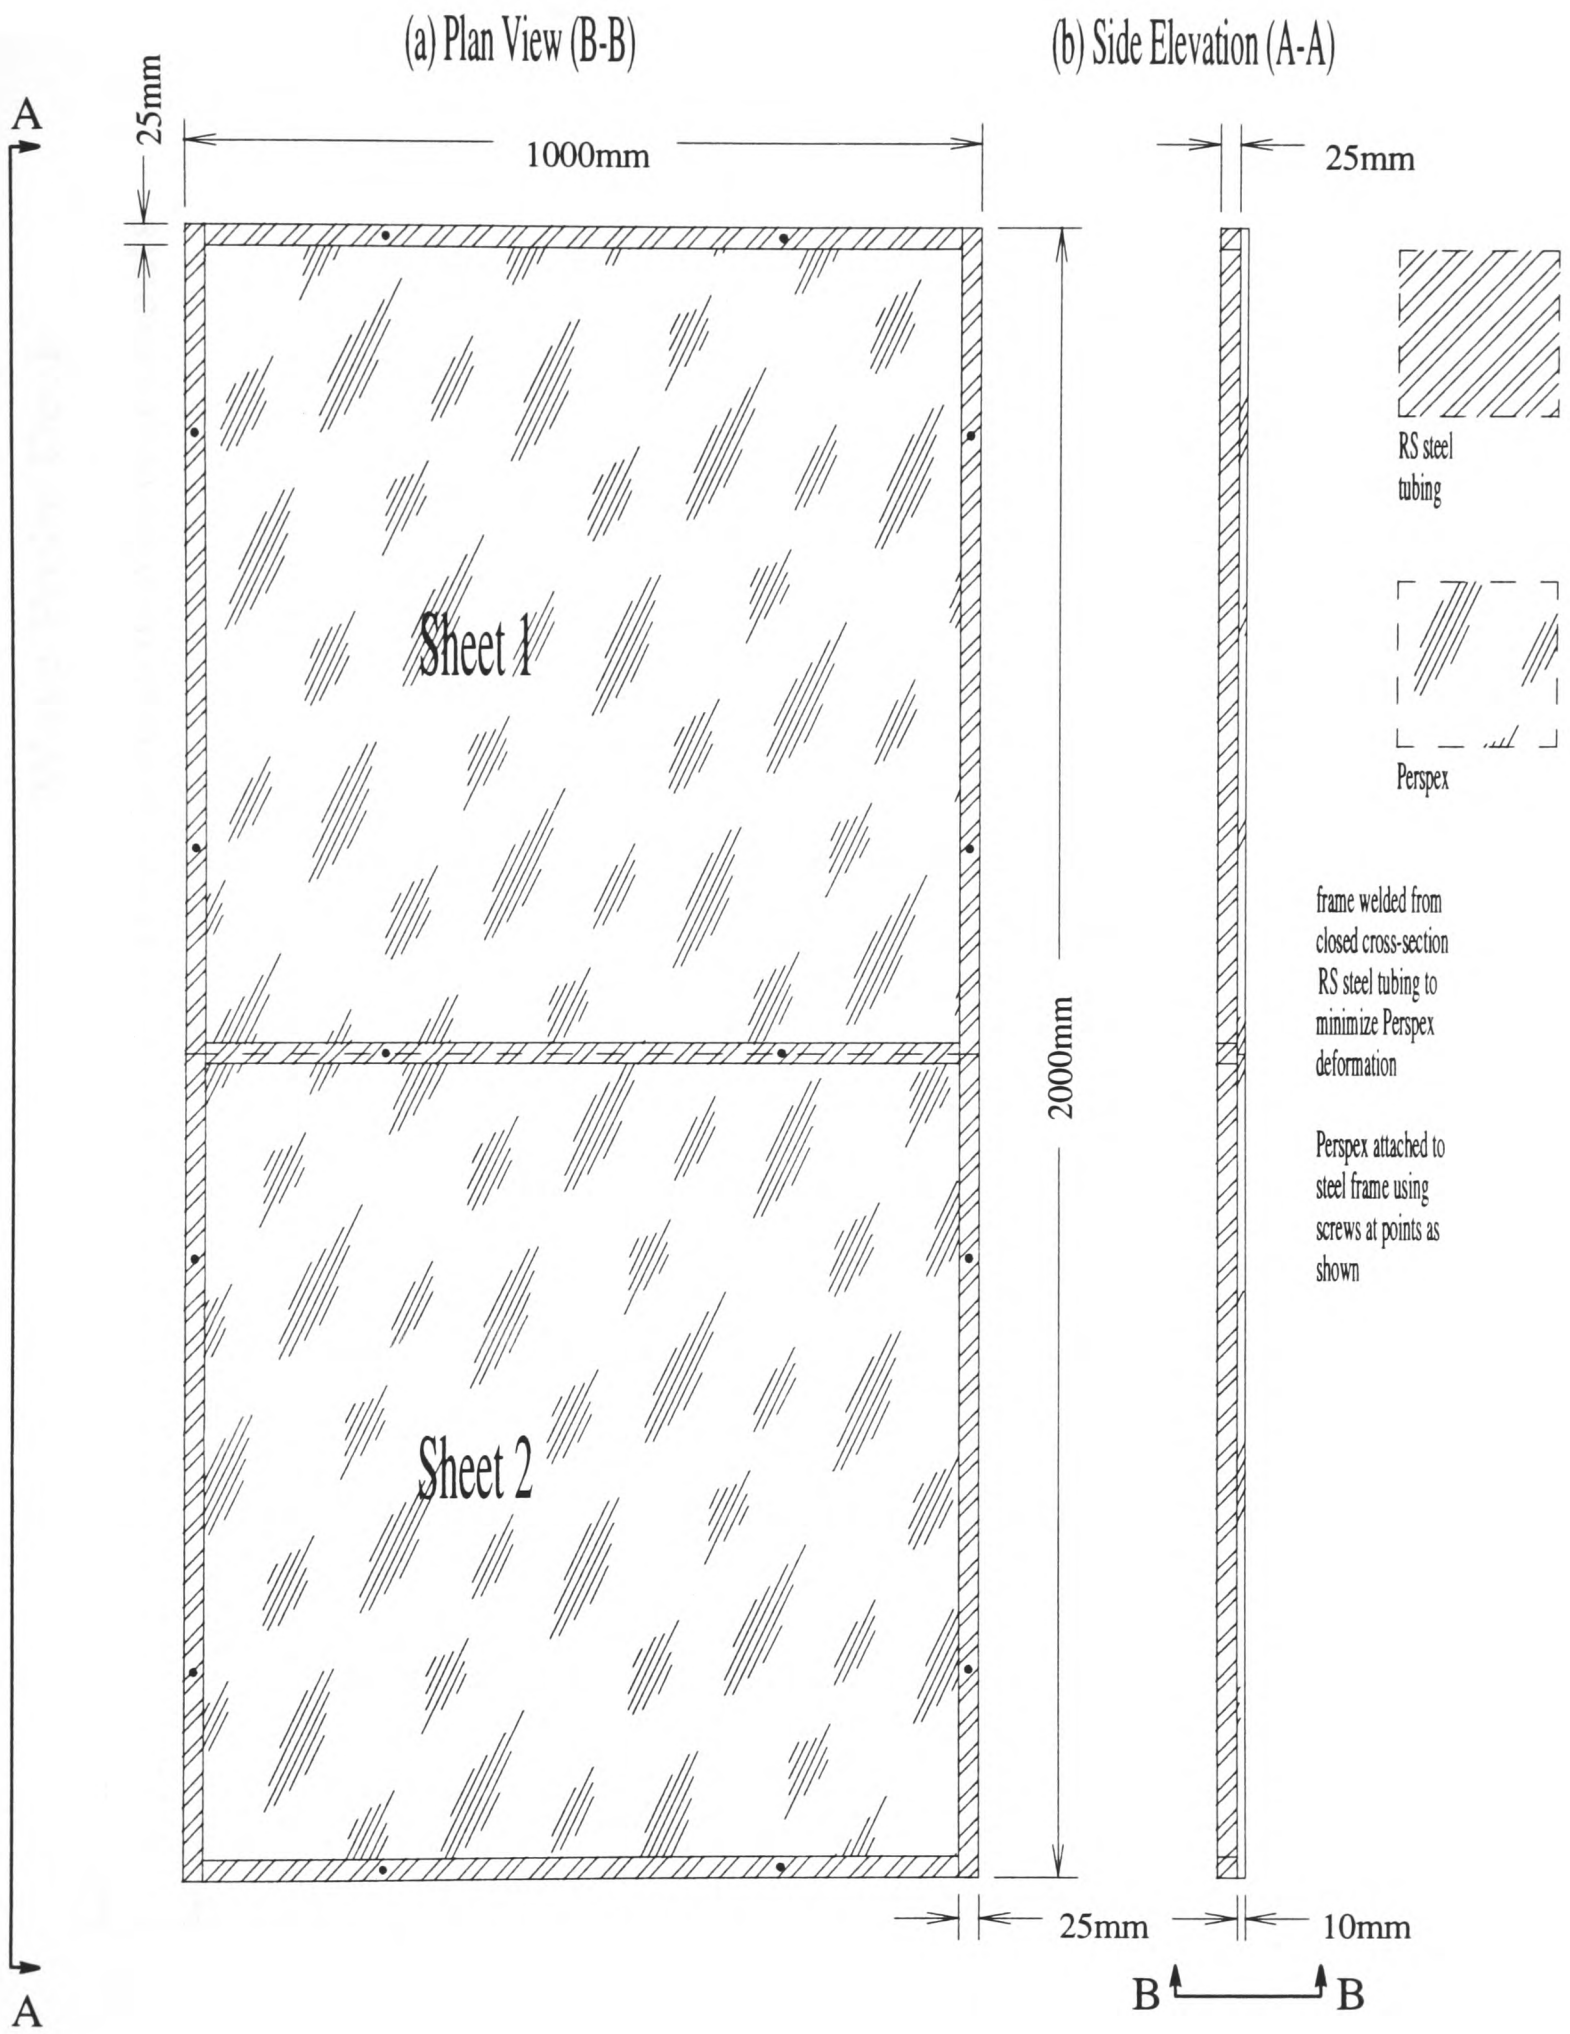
Schematic diagram of the deck structure supporting the wave probes in plan view (a) and side elevation (b)
